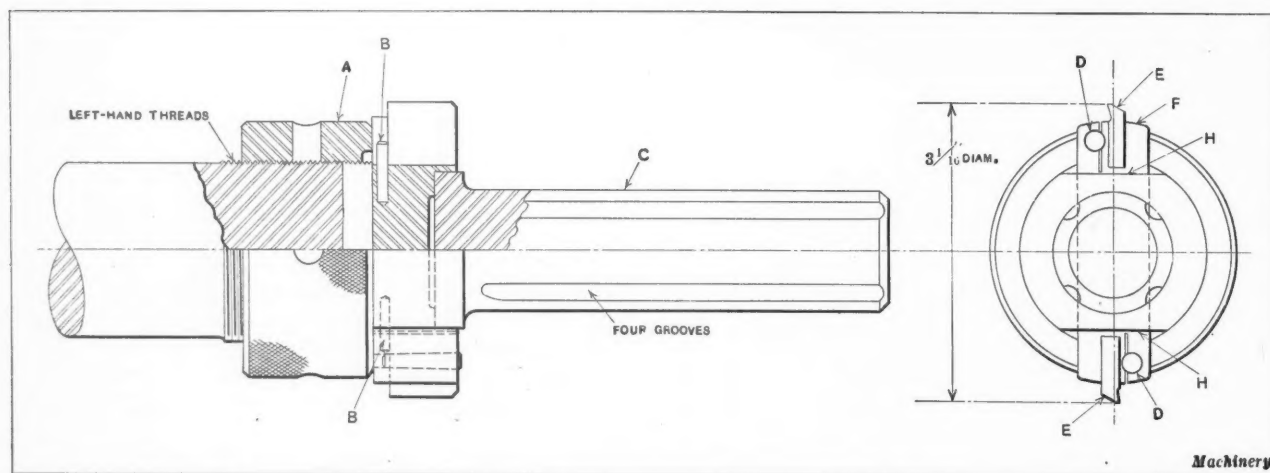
Boring-bar for boring Crankshaft Hole in Connecting-rods
